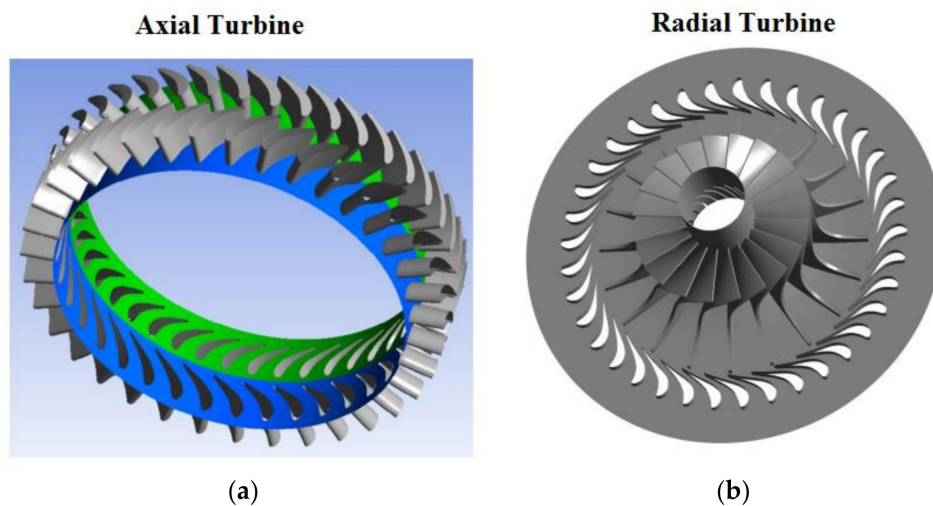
3D geometries of (a) axial turbine [164], and (b) radial turbine [165].
